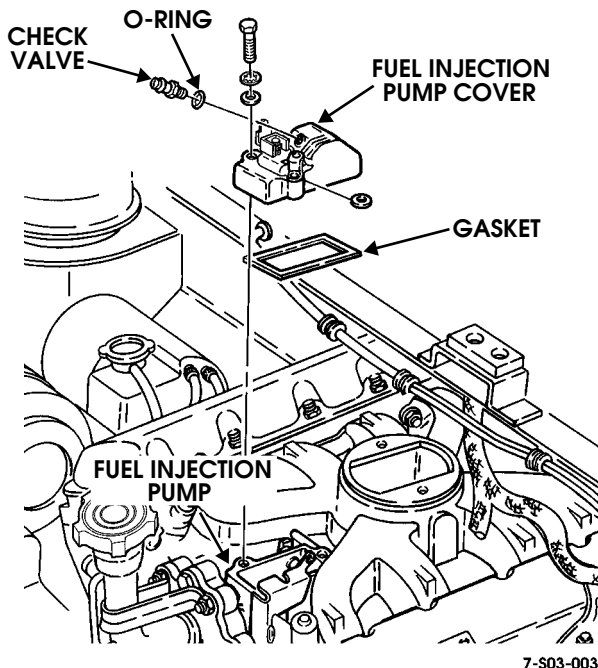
Pump Cover Removal/Installation (NA Diesel)
